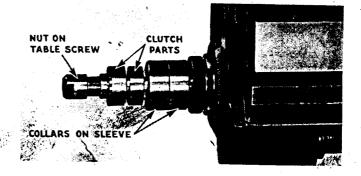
(above) and Fig. 19 (below). Parts to be removed for installing "Gear on Screw". In lower illustration the ball crank, ball crank clutch and sleeve have been removed and the nut on table screw loosened.
